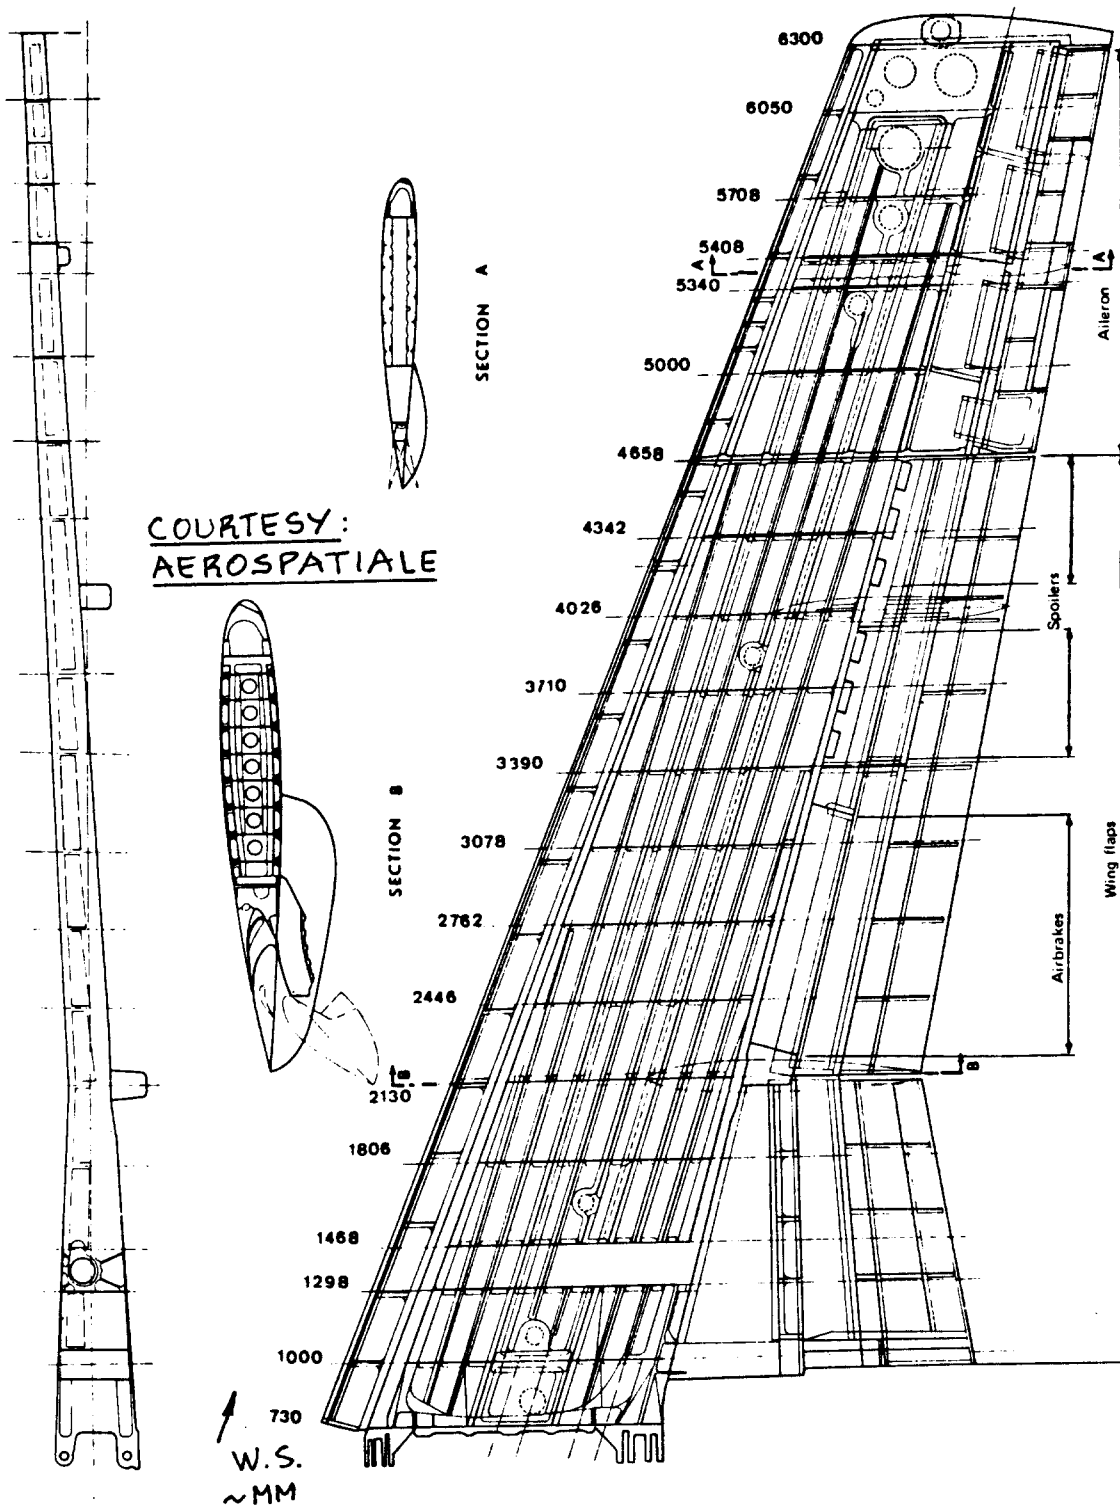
Wing Structural Arrangement Aerospatiale Corvette
